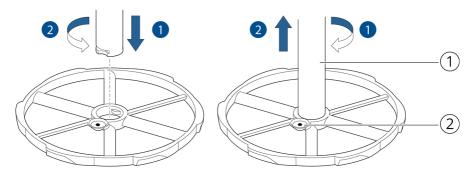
Disposable blade (DSP): Assembly and disassembly
